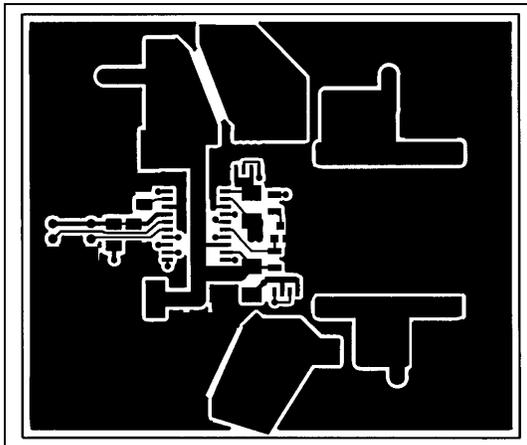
MAX742 EV Kit PC Board Layout—Component Side
